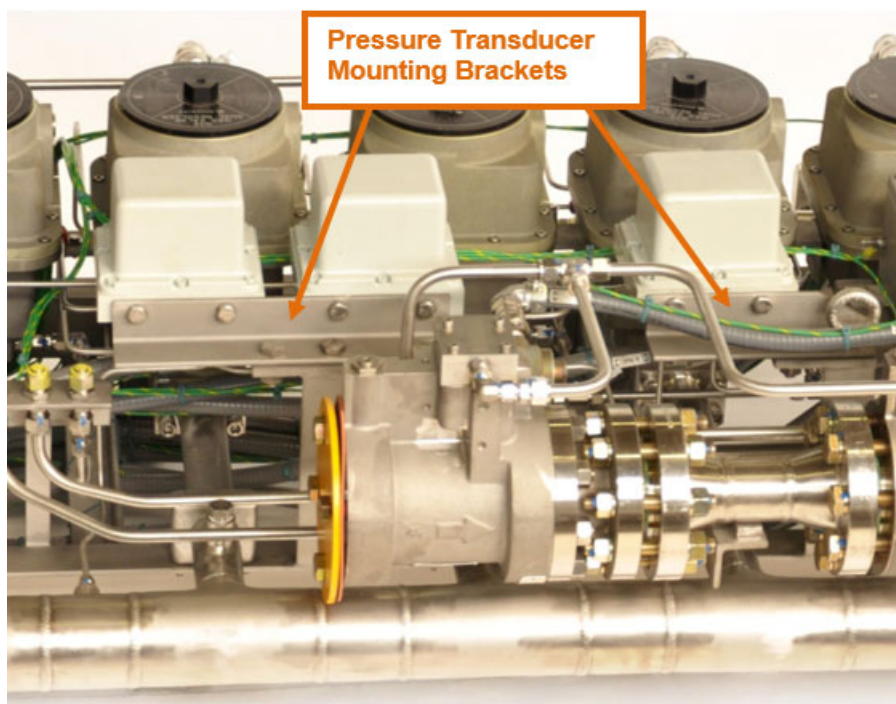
Smart Pressure Transducer Mounting Brackets
